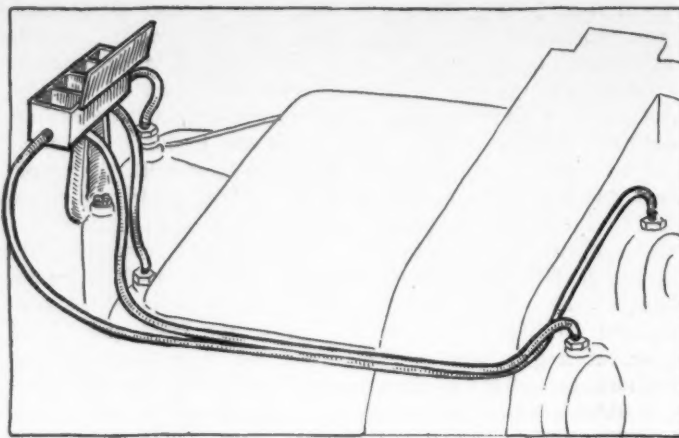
PEERLESS GEAR BOX LUBRICATION
